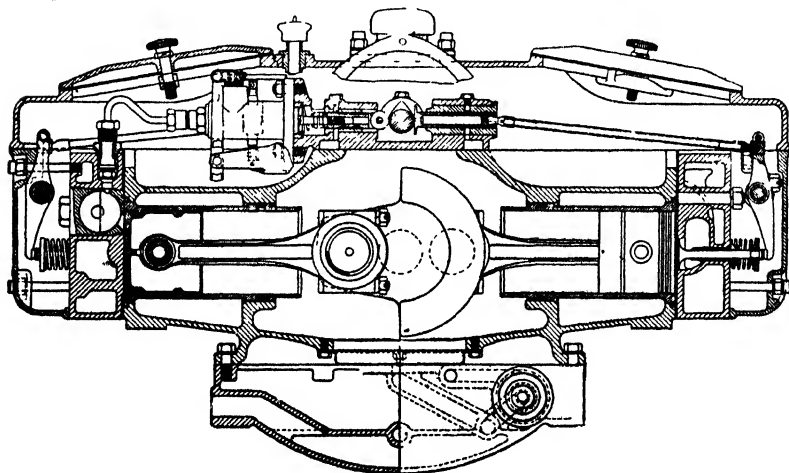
The Victor Opposed Cylinder Oil Engine.
